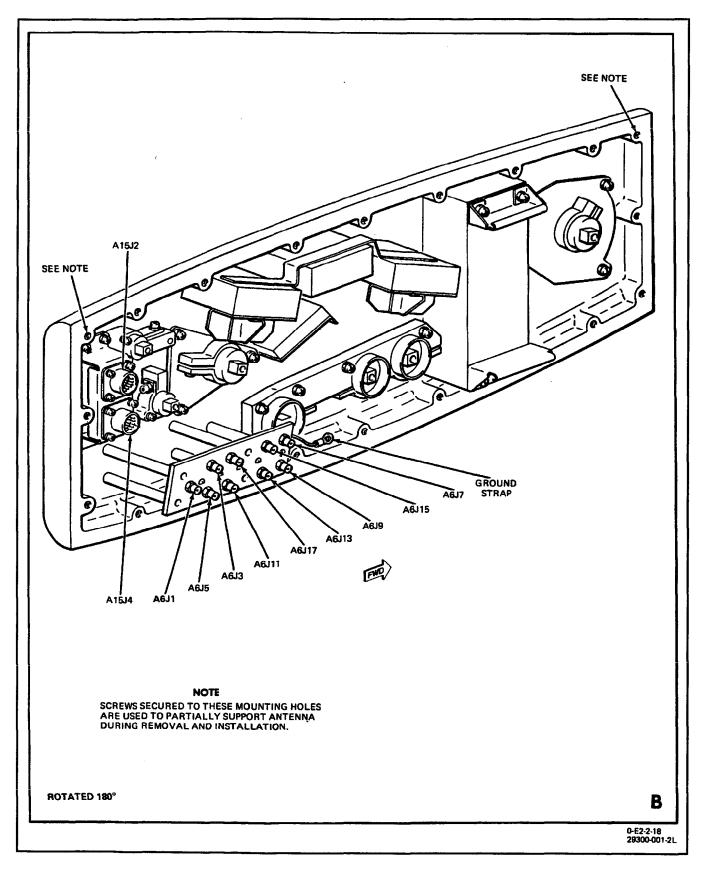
Removal and Installation of Antenna Assembly AS-3496/ALR-73 (Sheet 2)
